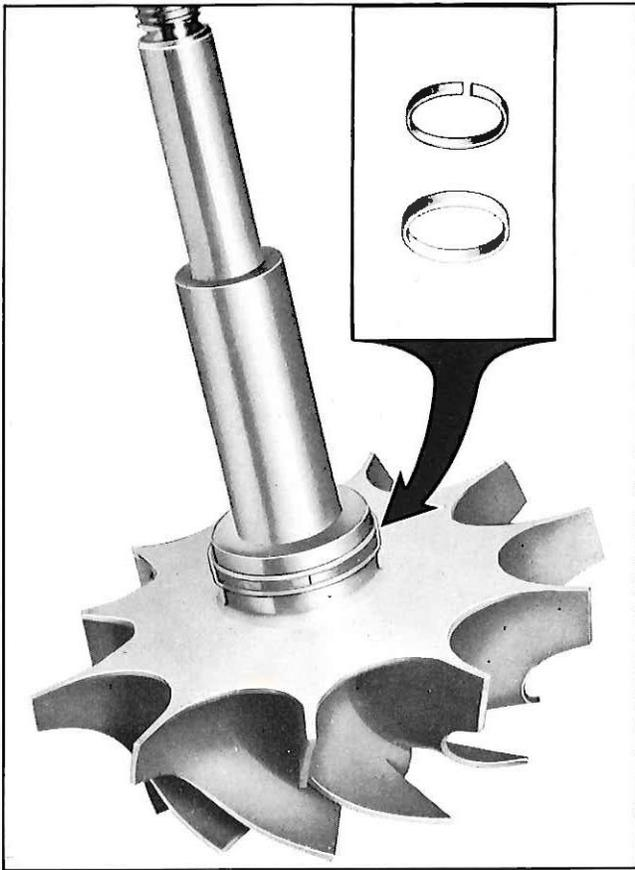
Compressing Ring, Using Plastic Installer Ring
